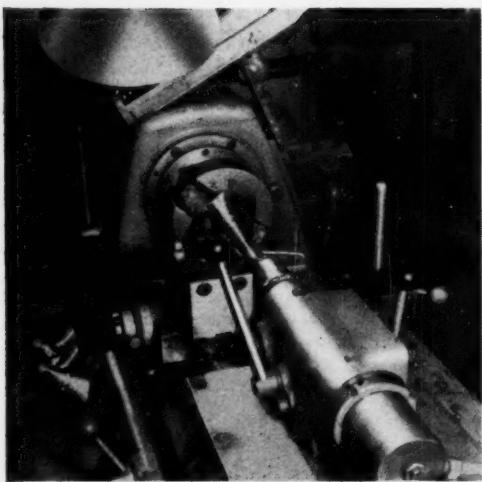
The Components are Threaded on the Type B Cri-Dan Machine Here Shown
